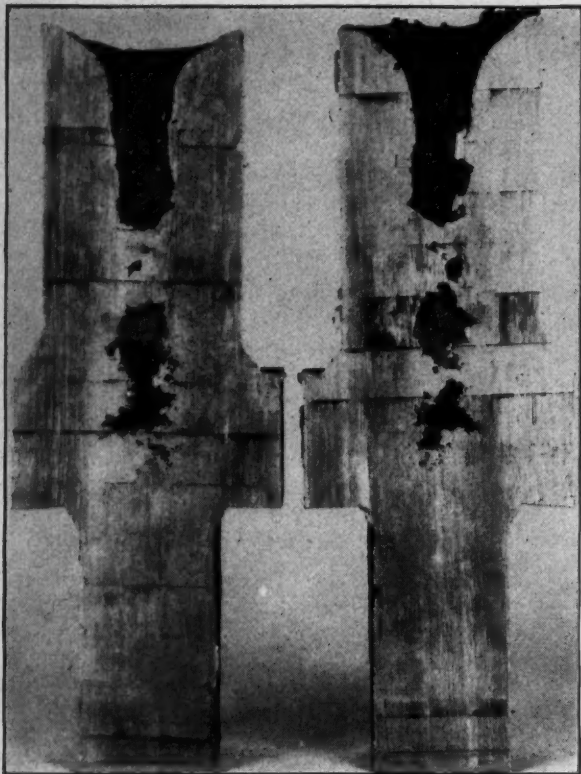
Nickel-copper alloy (monel metal) test casting; conventional carbon-free pipe eliminator used. Note that shrinkage extends into casting.
